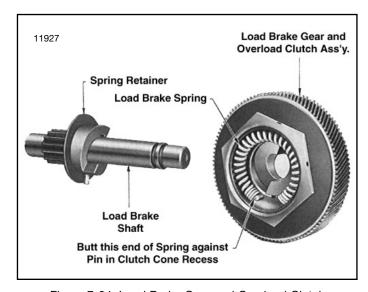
Load Brake Gear and Overload Clutch Assembly Removed from Load Brake Shaft Showing Brake Spring Installed in Clutch Cone
